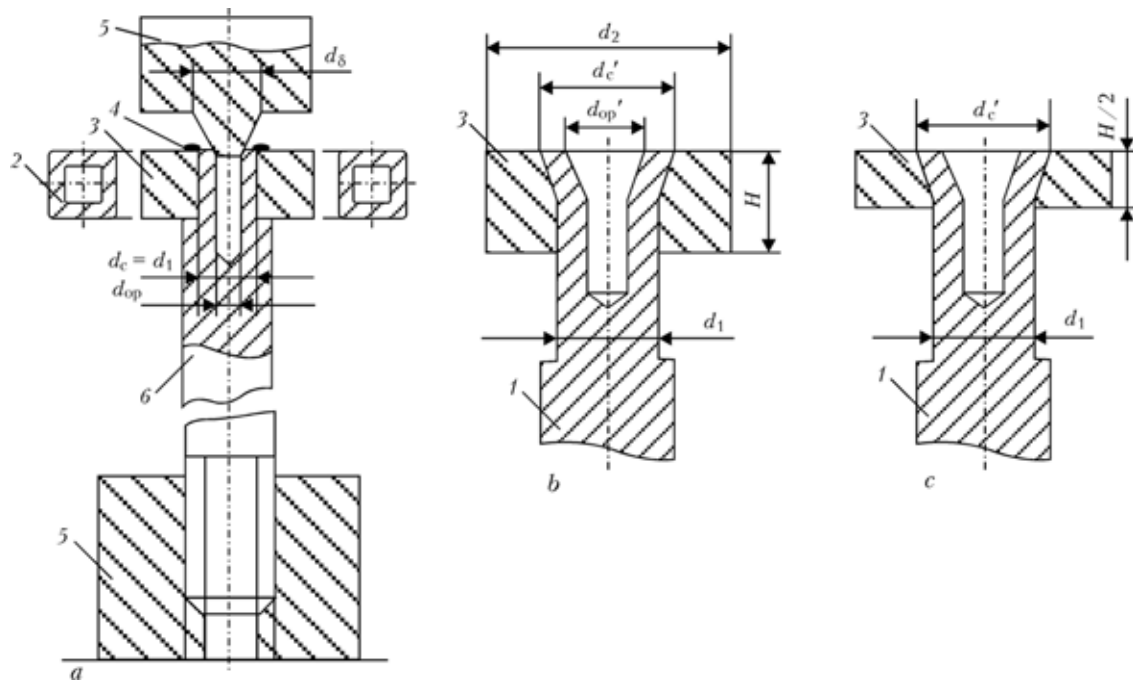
Schematic of simulation of the process of braze-welding of a flange joint with pipe flanging: *a* — process schematic; *b* — sample; *c* — sample after machining for shear testing; 1 — pin; 2 — inductor; 3 — washer; 4 — activator; 5 — cone-shaped striker; 6 — rest
